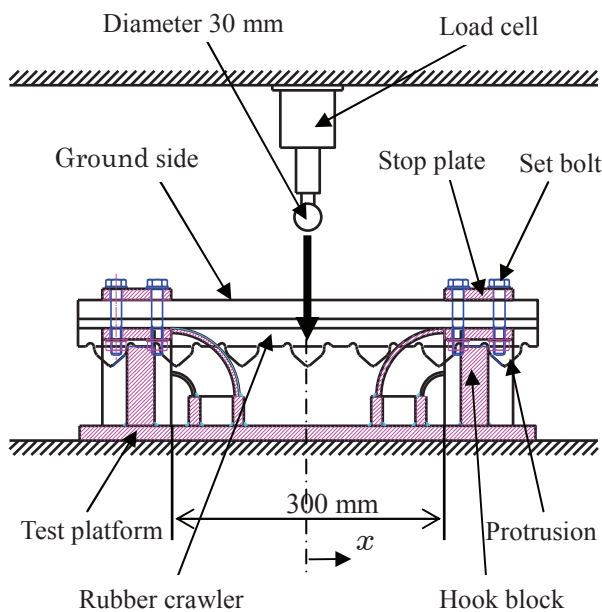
Loading test of the test piece made of coreless rubber crawler
